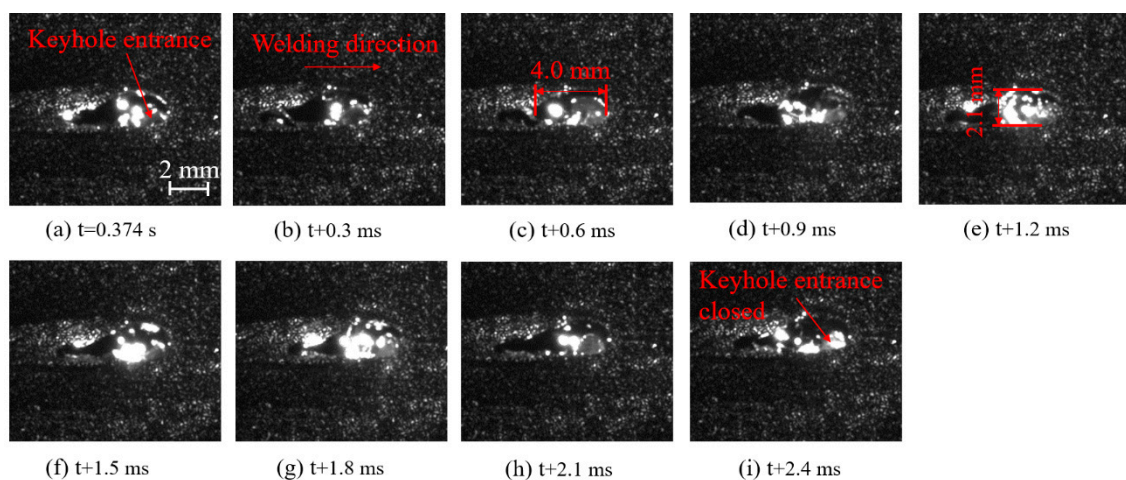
Dynamic change process of the weld pool and keyhole entrance during laser welding without shielding gas ($p_{\text{laser}} = 2000 \text{ W}$, $v = 1.2 \text{ m/min}$, $\Delta = +3 \text{ mm}$).
